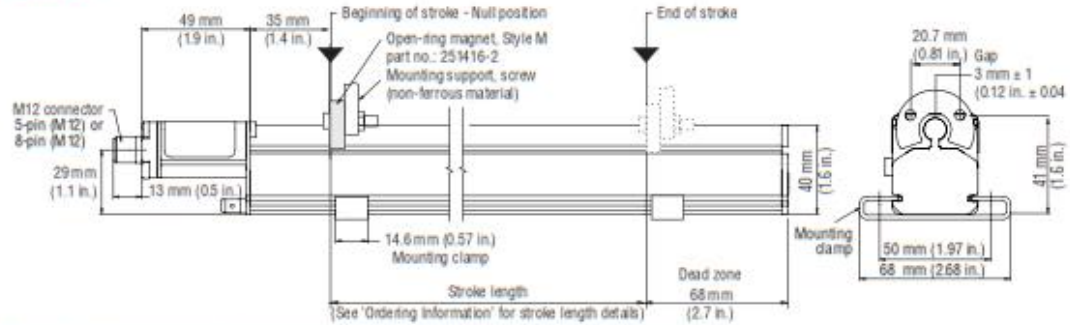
E-Series model EP sensor dimension reference (Shown with Style M open-ring magnet)
